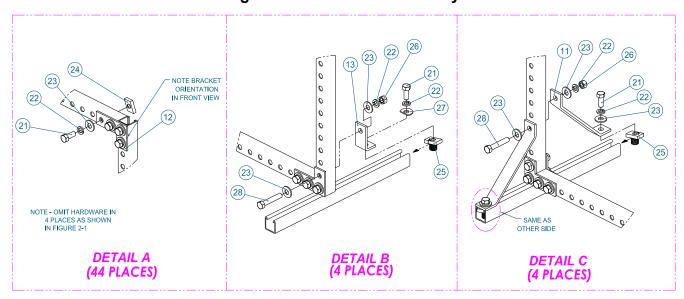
Uni-Strut Assembly, Hardware Placement
